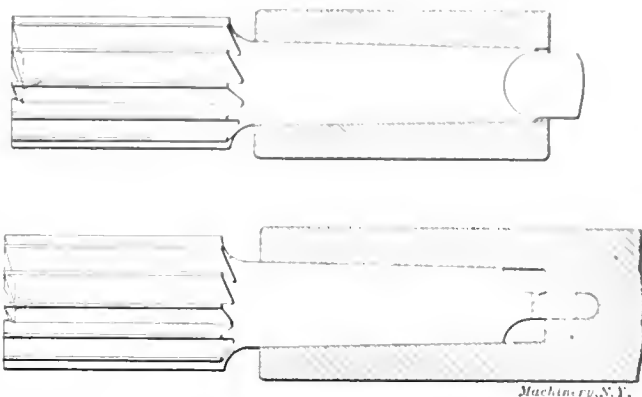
Shank of an End Mill properly fitted to the Gage and Socket
